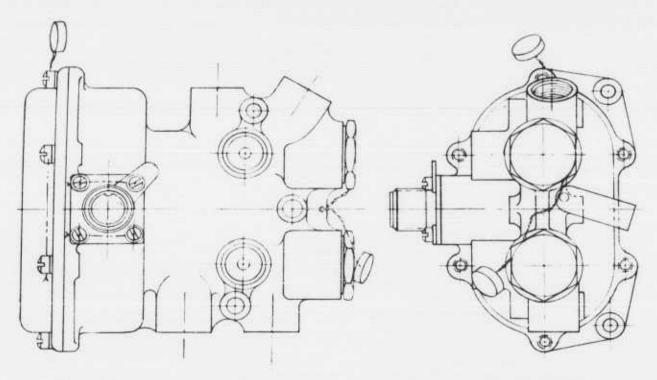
Cross Section - Valve Assembly - Solenoid Actuated, 5-Way 62-472-412
